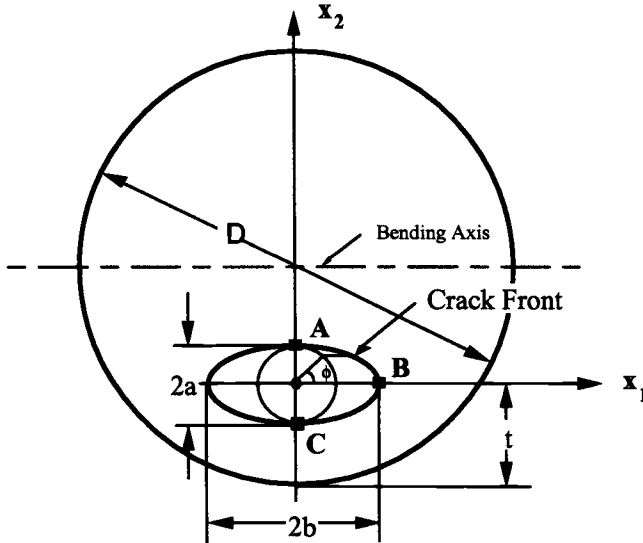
Definition of an elliptical subsurface crack in a round shaft.
